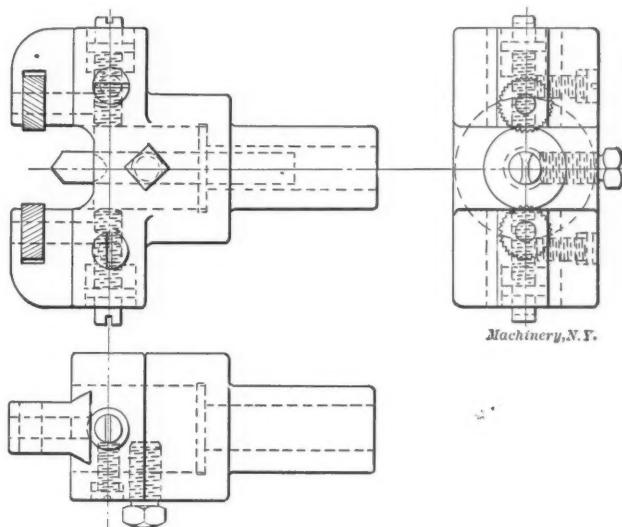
Turret Knurl-holder for Brown & Sharpe Automatic Screw Machines
